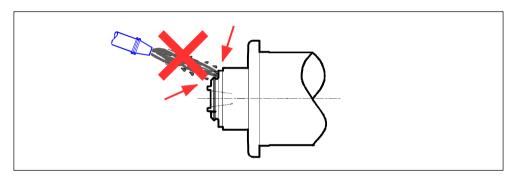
The jet of cooling–lubricating medium may not be directly aimed at the labyrinth seal
